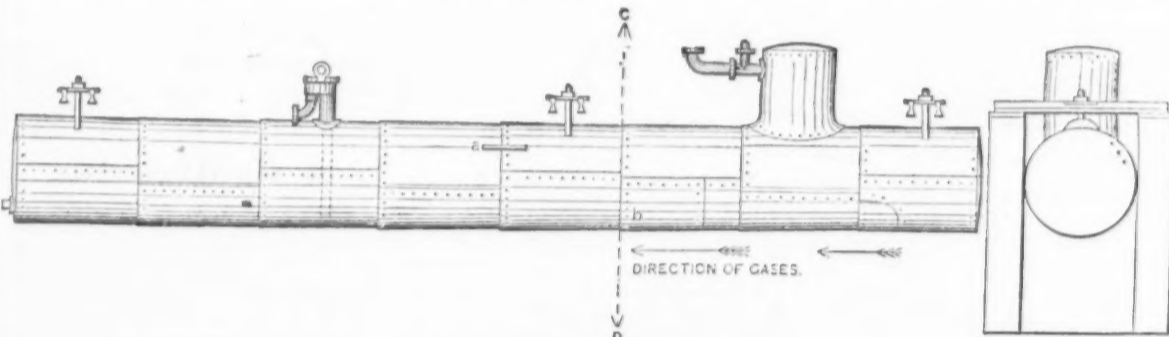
A Common Plain Cylinder Rolling Mill Boiler.
